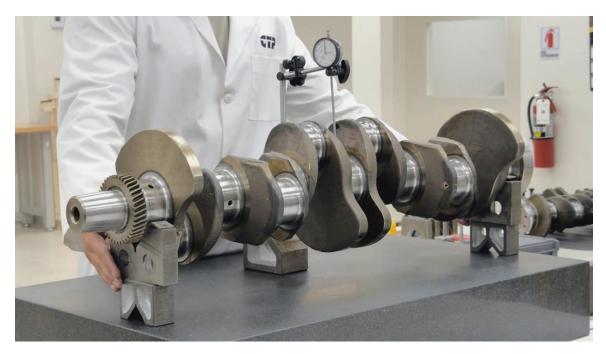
V BLOCK CRANK INSPECTION MACHINE
